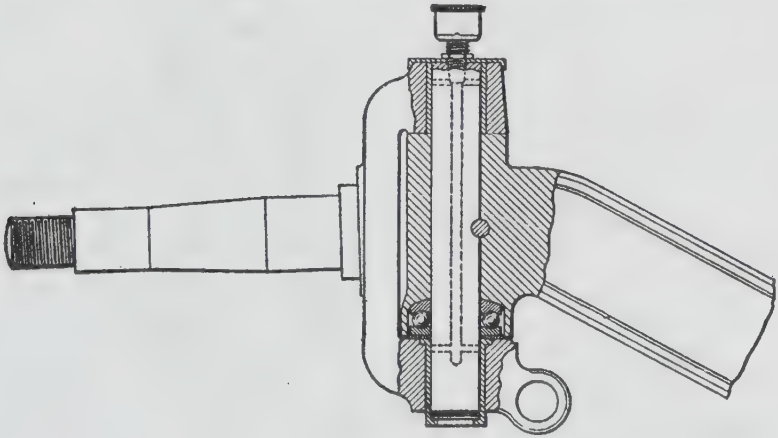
REVERSED ELLIOTT TYPE STEERING HEAD.
